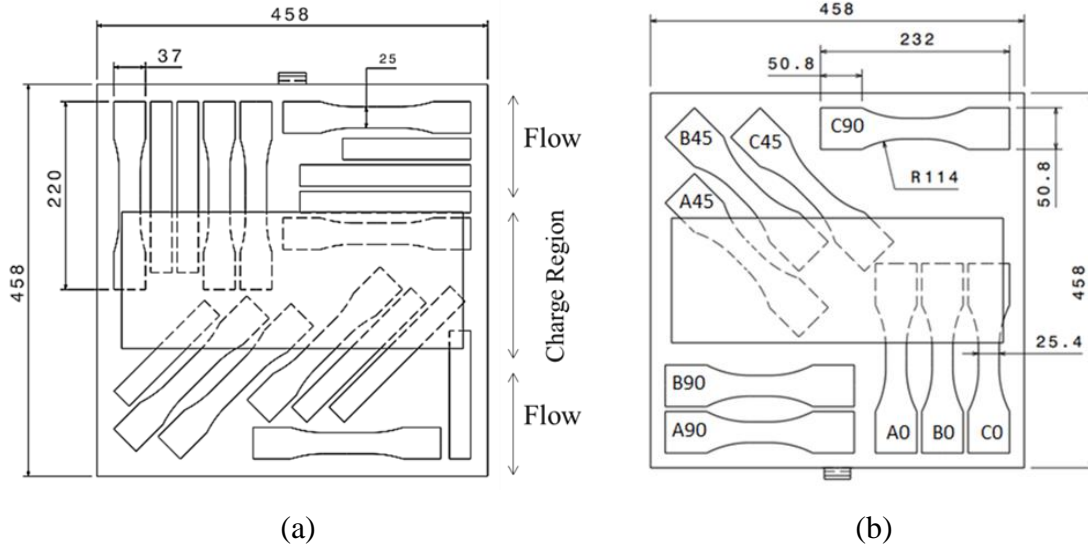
PA66/40% carbon fibre LFT-D (a) Quasi-static specimen layout and (b) Fatigue specimen layout (all dimensions in mm)
